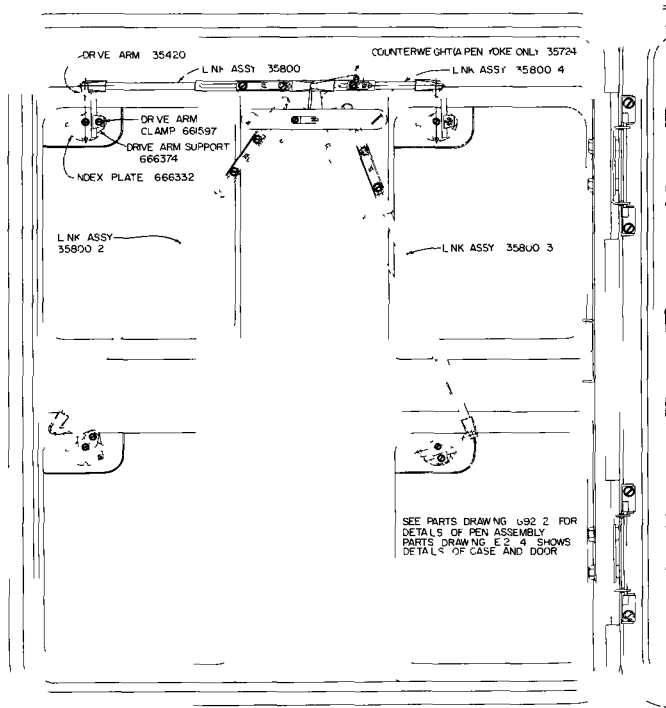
Parts Drawing E12 105, Electric Receivers in Type WM55 Recorder
